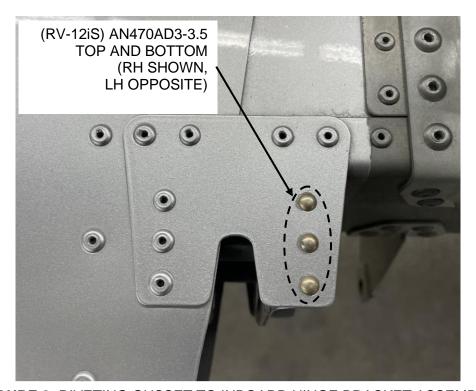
RIVETING GUSSET TO INBOARD HINGE BRACKET ASSEMBLY
